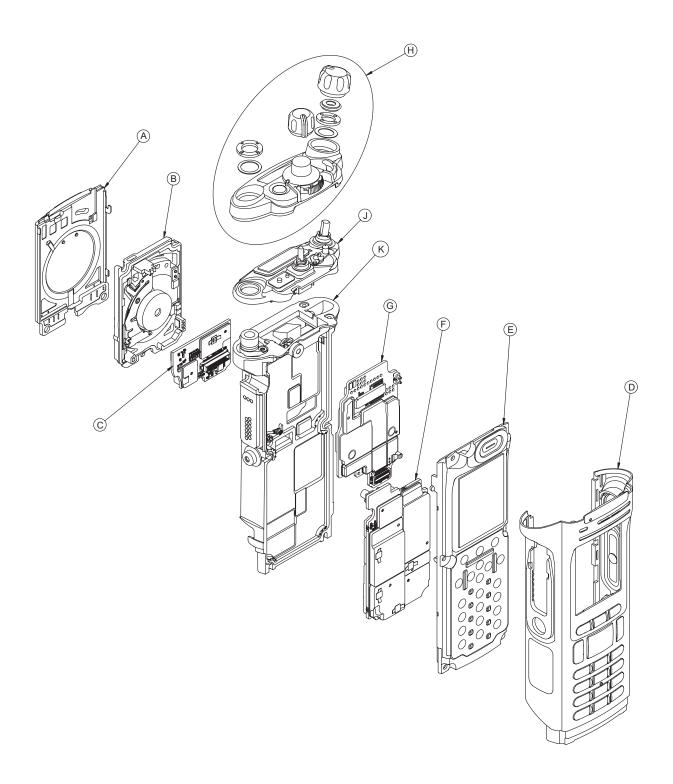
APX 7000 Dual Display Partial Exploded View
